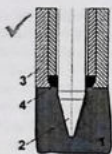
In the product area (1), a sensor (2) can be installed via a weld-in adapter (3) and a hygienic process connection sandwich into the pipeline. The detachable seal joint (e.g. O-ring, 4) is almost completely enclosed with the surrounding metal protecting the non-product side from the product contact area (Lelieveld et al., 2003; Hauser et al., 2007).
